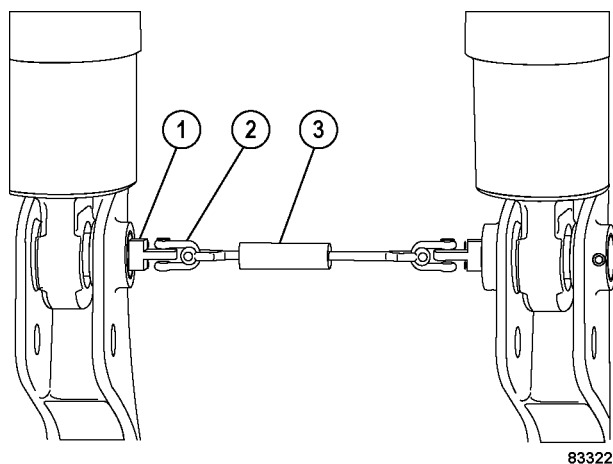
REAR SUSPENSION PIN REMOVAL TOOL
